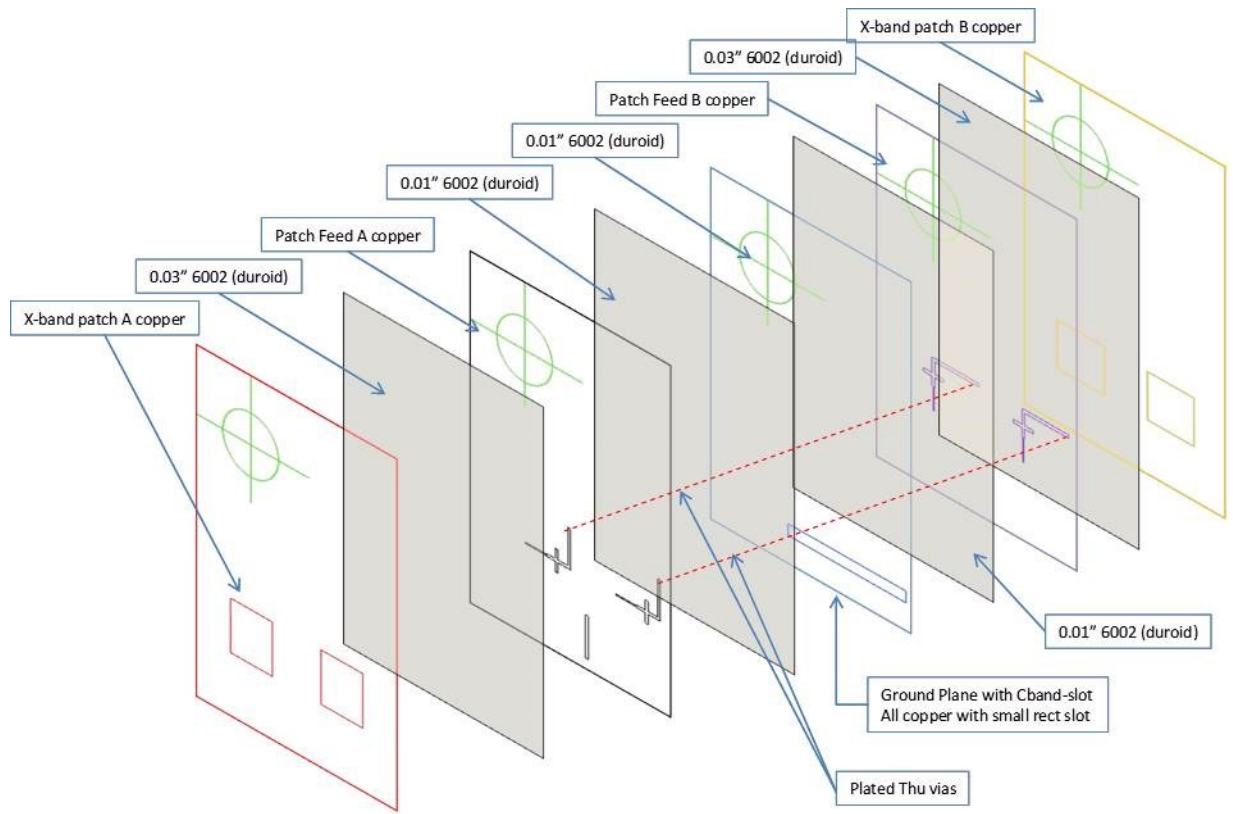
Exploded view of WiPAA unit cell showing 5 copper layers separated by 4 sheets of dielectric material.
